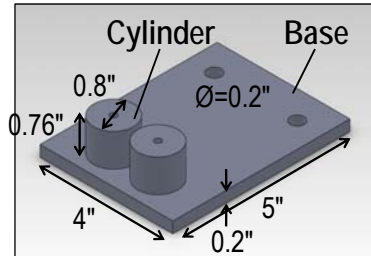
Design of the base to accommodate the flange bearing and cylinders.
